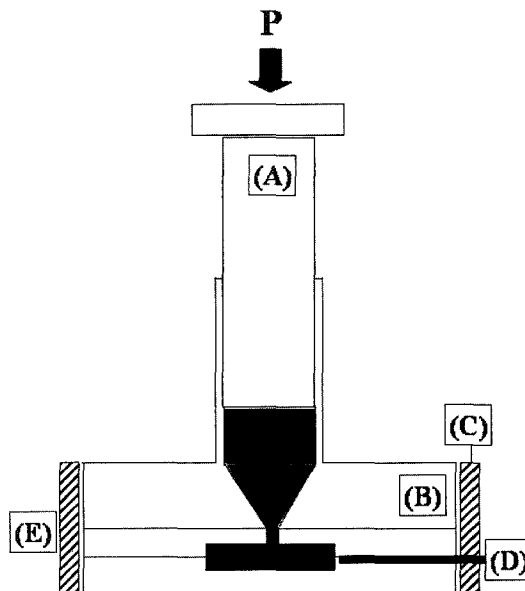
Schematic diagram of injection molding apparatus: (a) punch, (b) mold, (c) heat bend, (d) thermocouple and (e) temperature controller.
